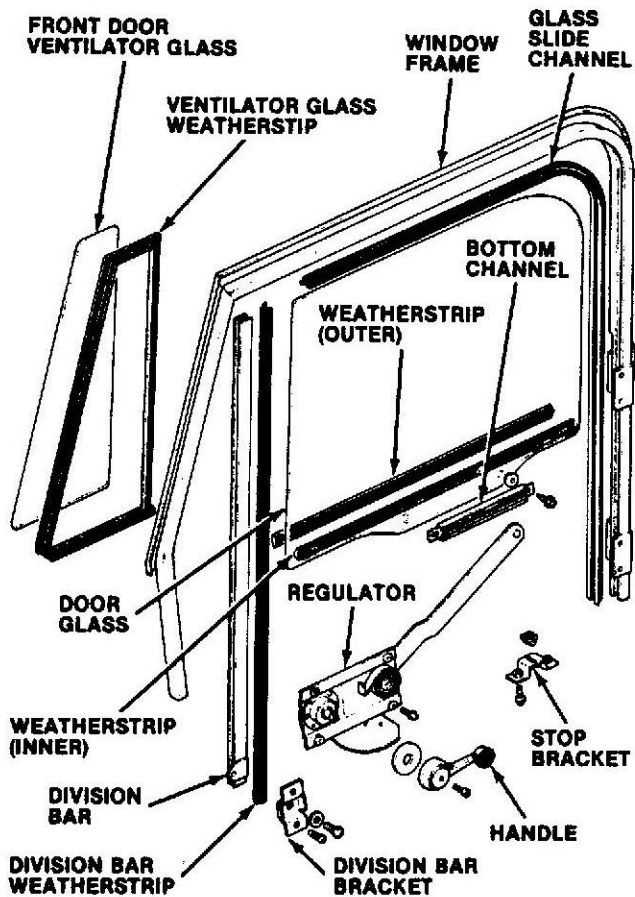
Metal Door Glass, Channel, and Frame Assembly
